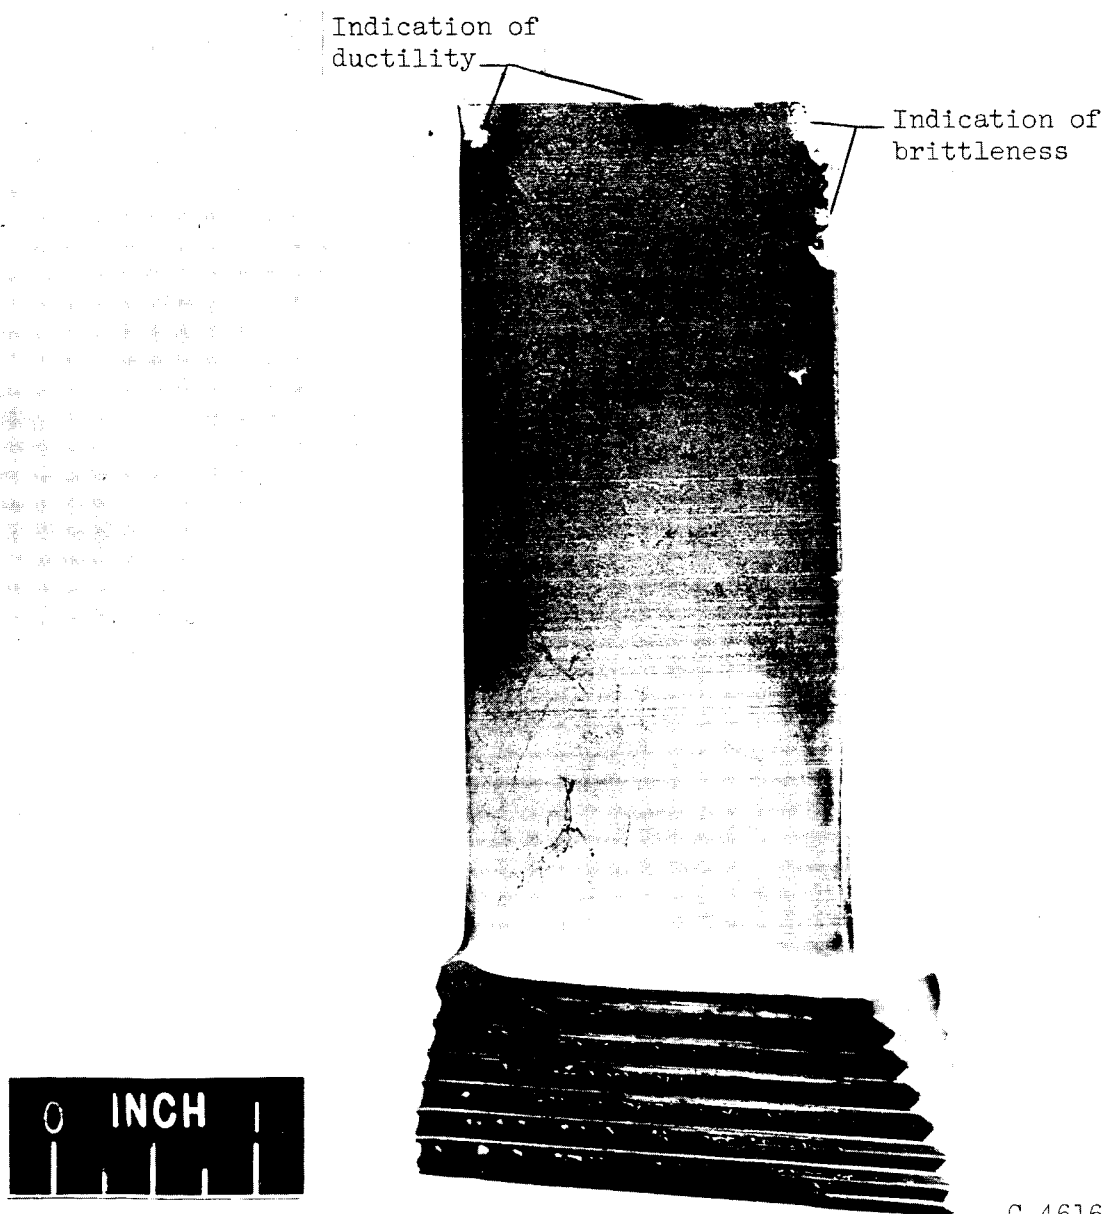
Typical mechanical-fatigue fracture. Vacuum-melted aluminized group-2 bucket operated for 268.6 hours.
